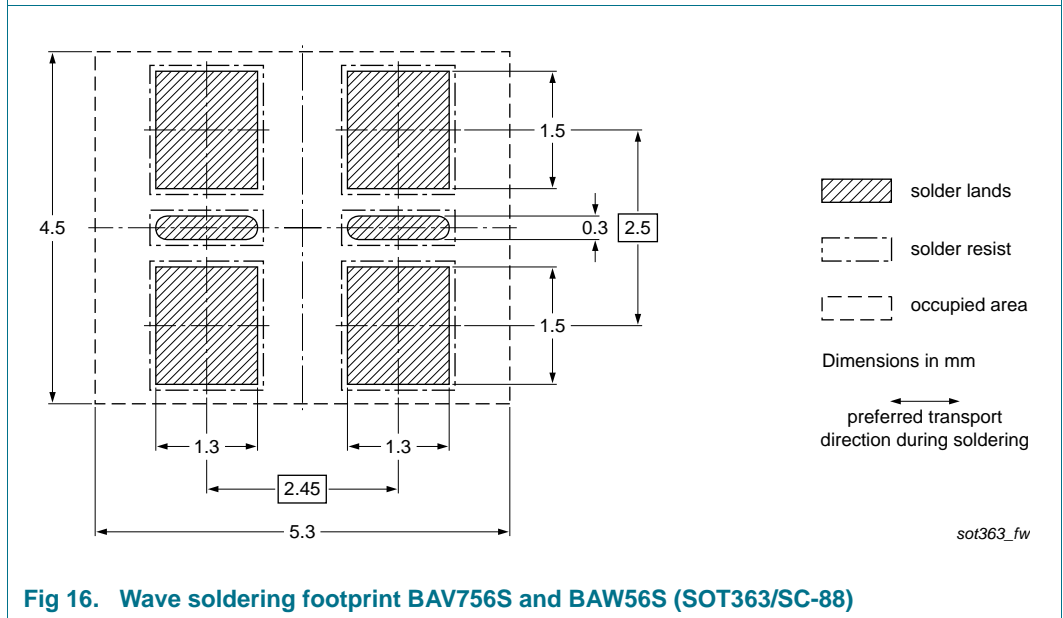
Wave soldering footprint BAV756S and BAW56S (SOT363/SC-88)
